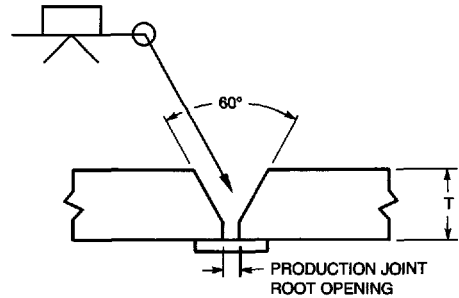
B—Tubular Butt Joint—Welder Qualification—With Backing
